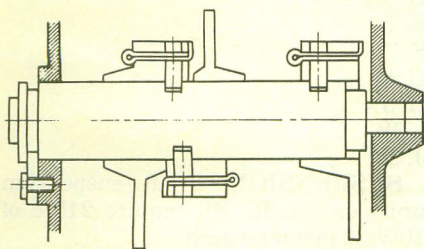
When installing the shift drum and forks, install cotter pins through guide pins in direction shown. Be sure that forks do not touch cotter pins.
